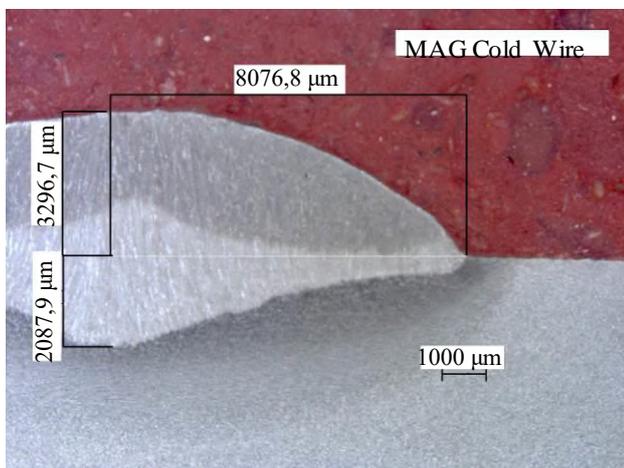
Weld bead with addition of cold wire in the melting puddle
